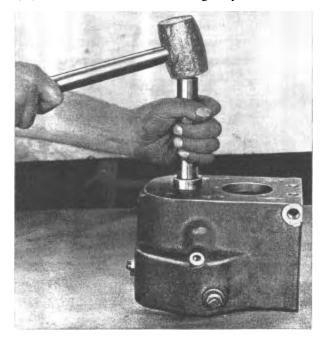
Removing and Replacing— J-450 Bushing Driver, J-780 Bushing Replacer
